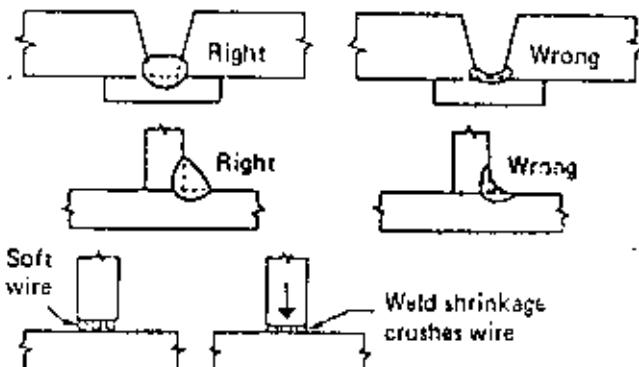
Factors in controlling weld cracking. Illustrated are correct and incorrect joint geometries and bead shapes and a technique to permit stress relaxation in an otherwise rigid joint.
